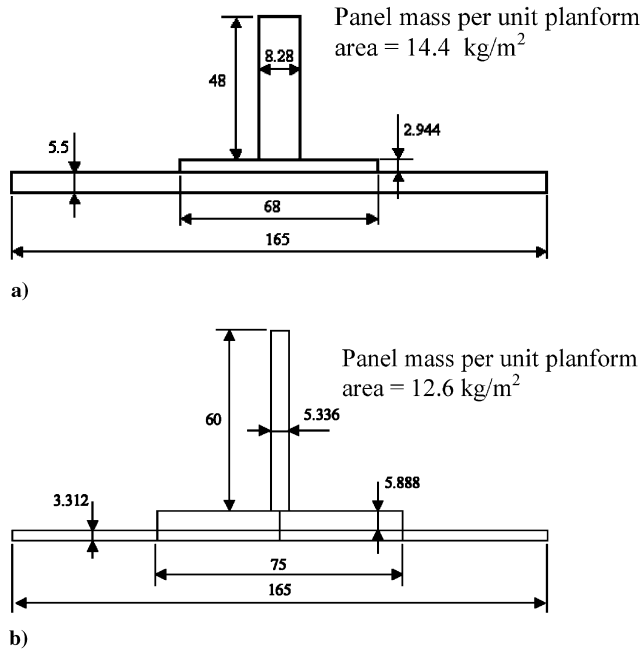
Cross section of wing cover panel designs. a) Datum design. b) New optimum design. All dimensions in mm.
